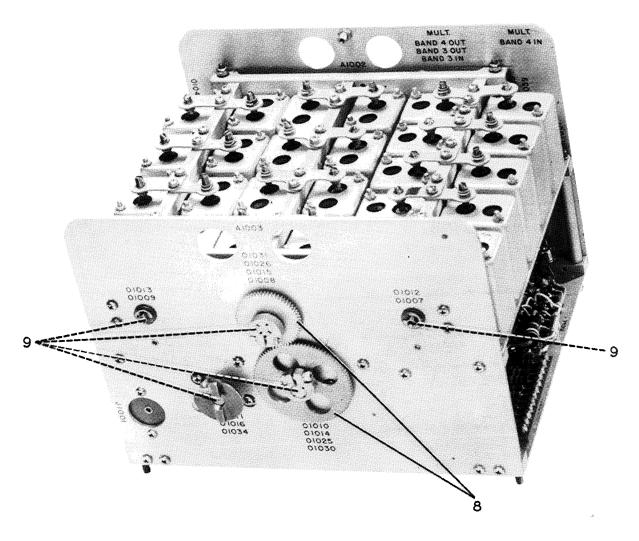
R-F Tuner, Rear Oblique View, Lubrication Points
